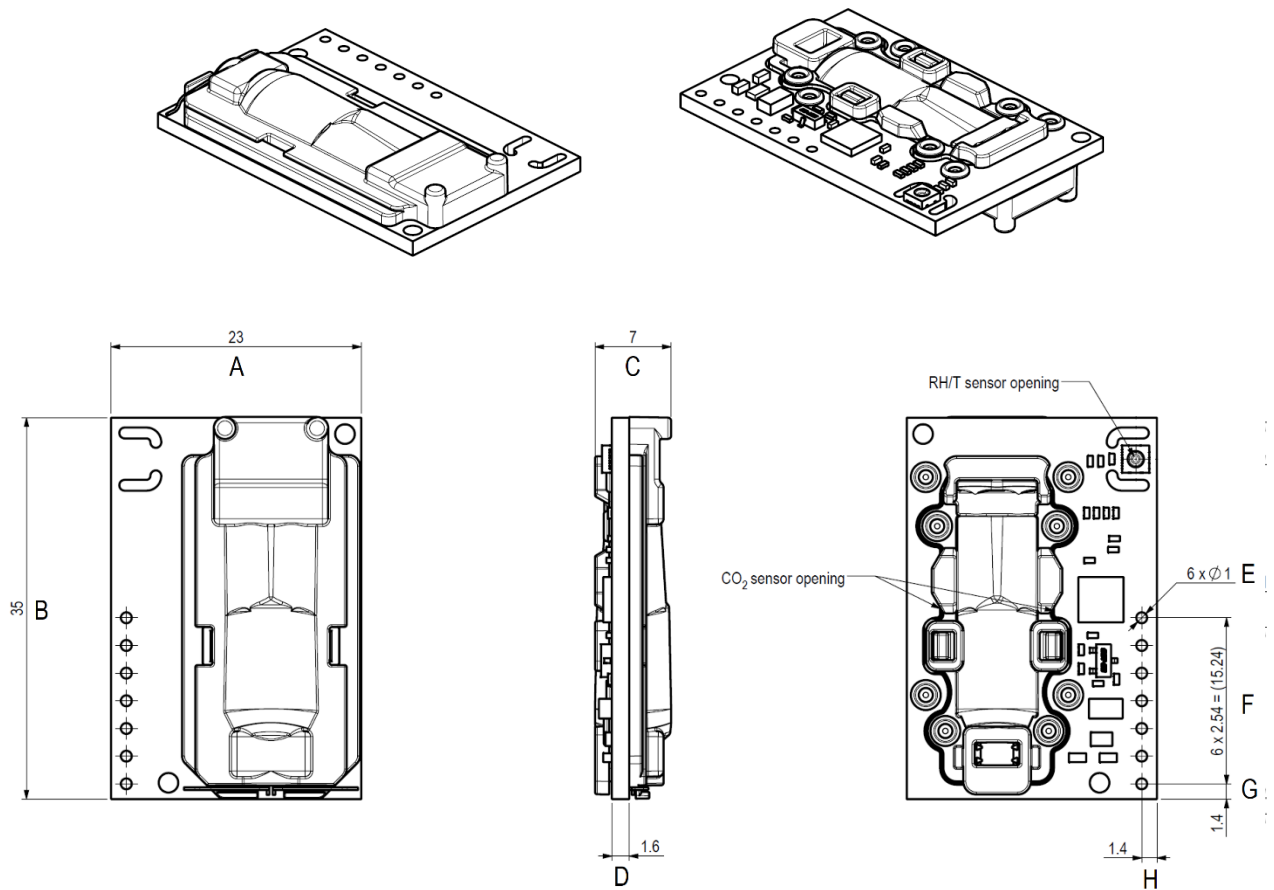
Product outline drawing of SCD30. Pictures on the left show top-view, pictures on the right bottom-view.
